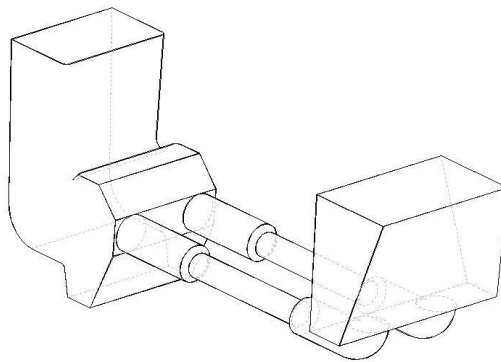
SolidWorks computer model showing the internal cavity of a test mould
